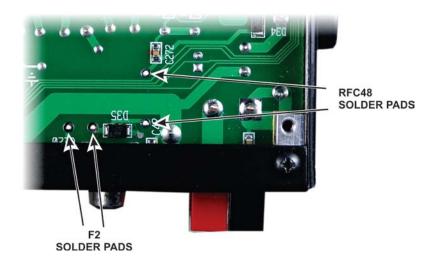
RFC48 and Fuse F2 Solder Pads on the Bottom of the Board.
